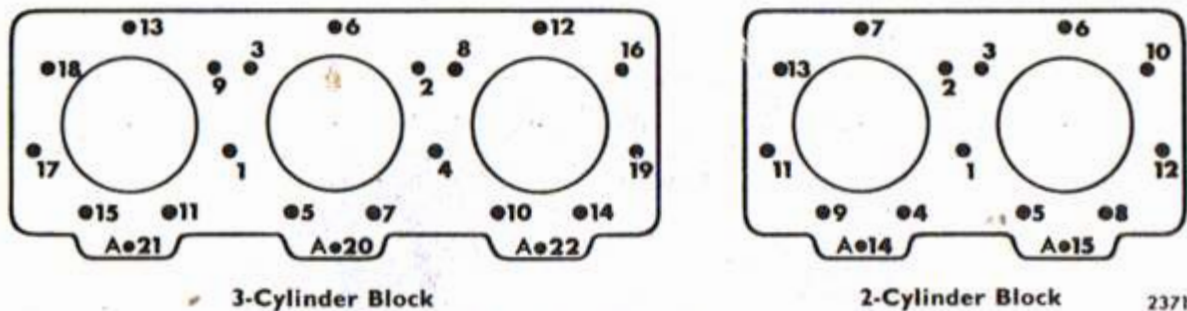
CYLINDER HEAD TIGHTENING SEQUENCE
